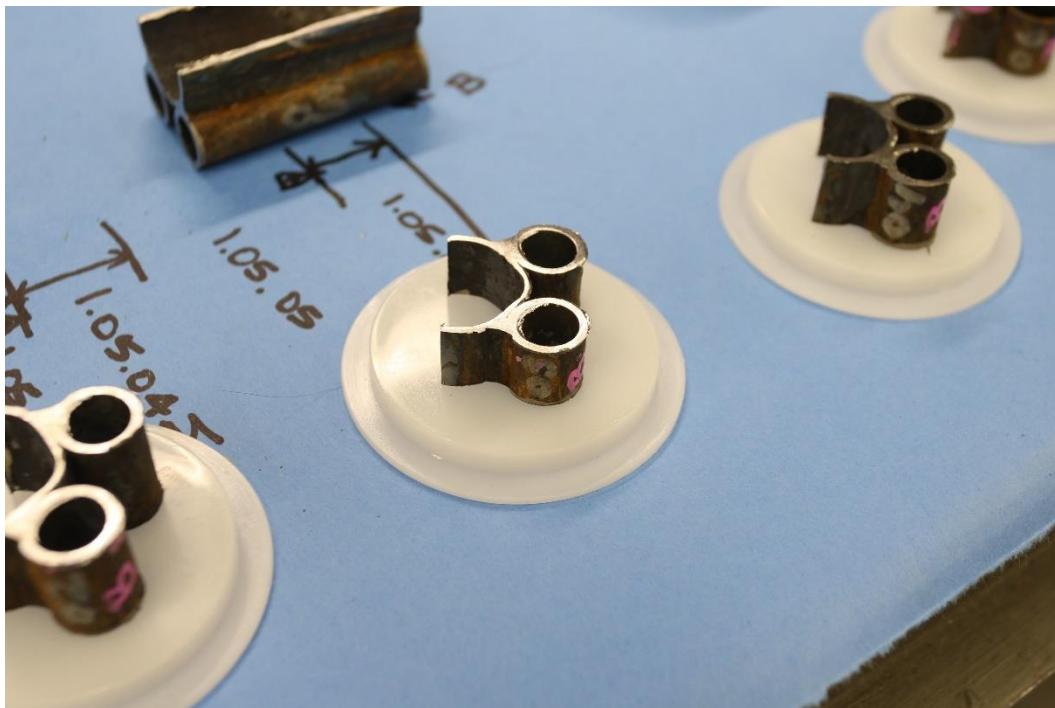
A photograph of the boiler tube after being sectioned to create metallographic mounts.
